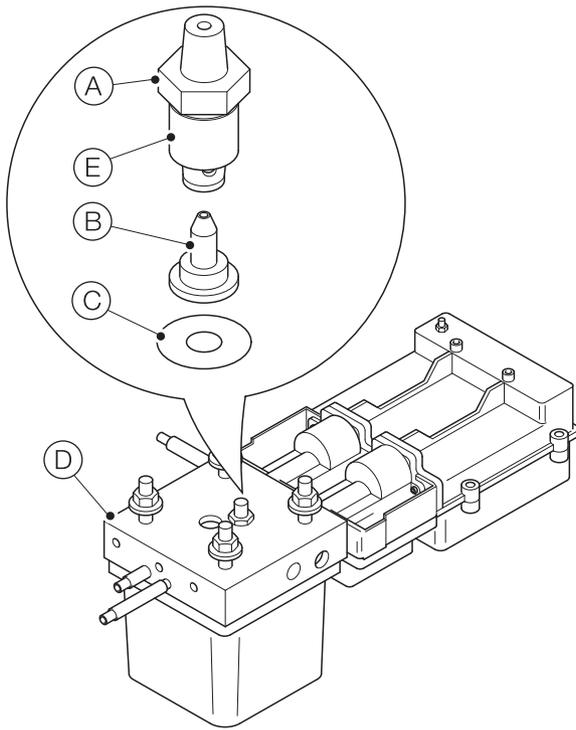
Replacing / Cleaning sensor assembly aspirator
